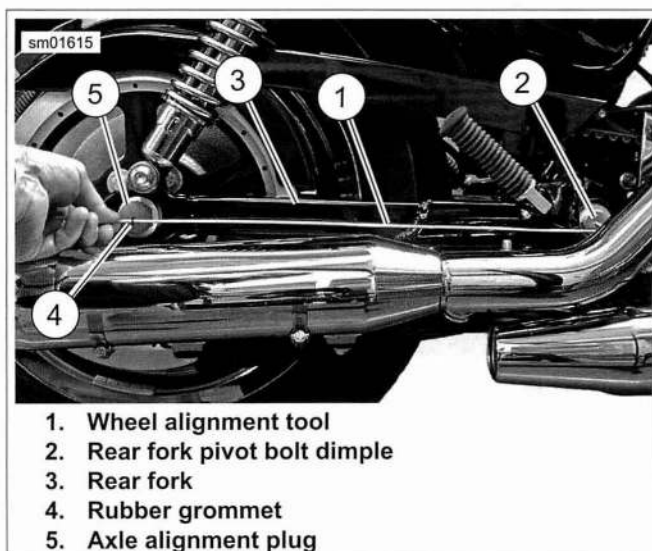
Checking Wheel Alignment Using Wheel Alignment Tool: XL Models
